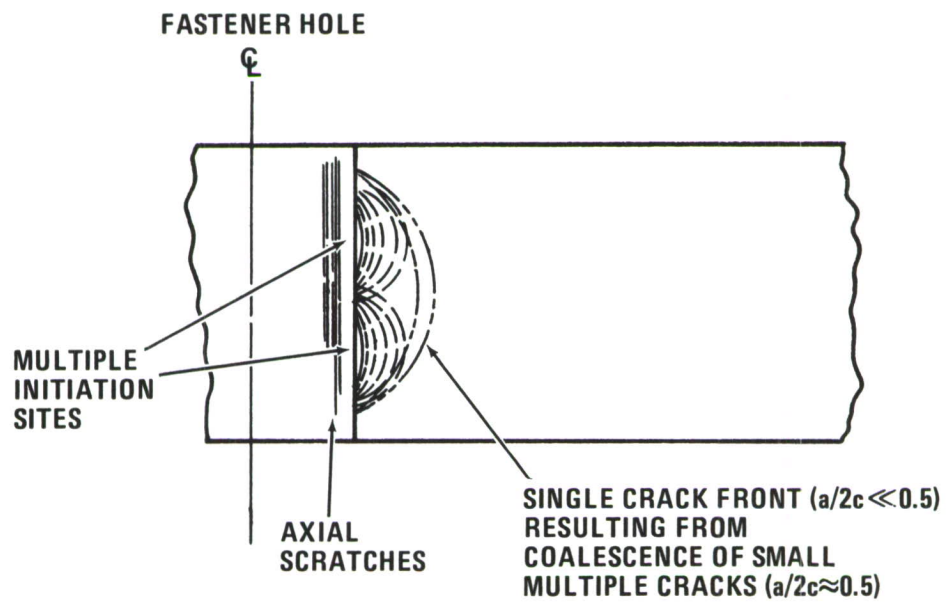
Coalescence of Multiple Cracks to Form a Single Large Crack
